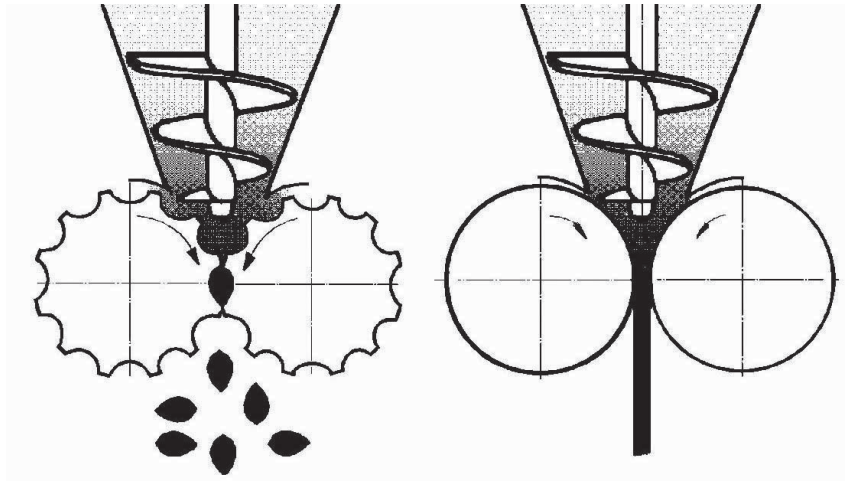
The examples of the use of screw feeders in roll press assembly to execute the process of a) briquetting, b) compacting [15]
